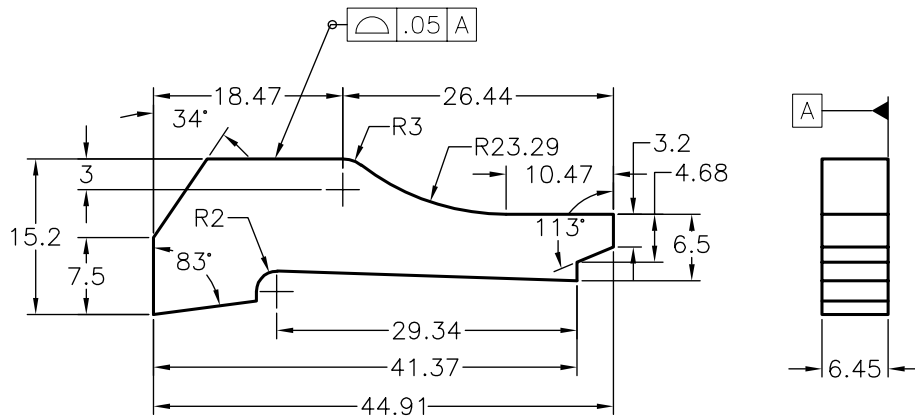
Specifying the profile-of-a-surface tolerance
